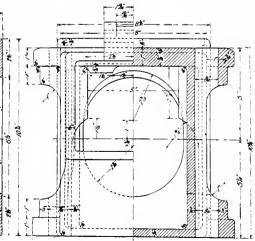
Standard Bearing and Wedge Assembled, for Journal 3¾ in. x 7 in. Sheet 3.
